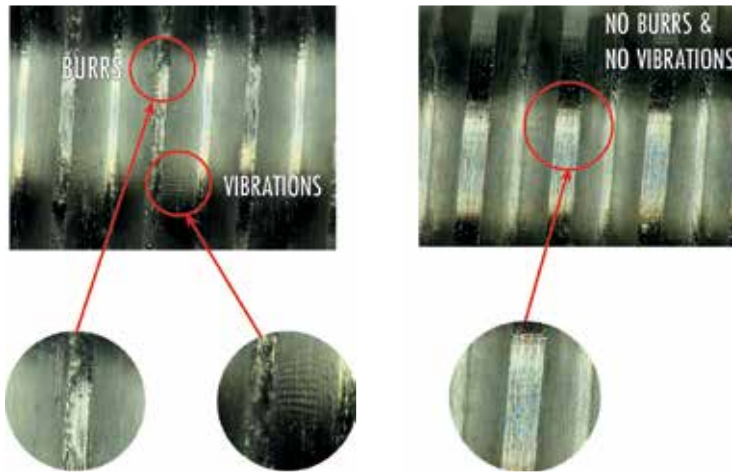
The GWi5000 guarantees a burr-free thread without extra deburring operations.
